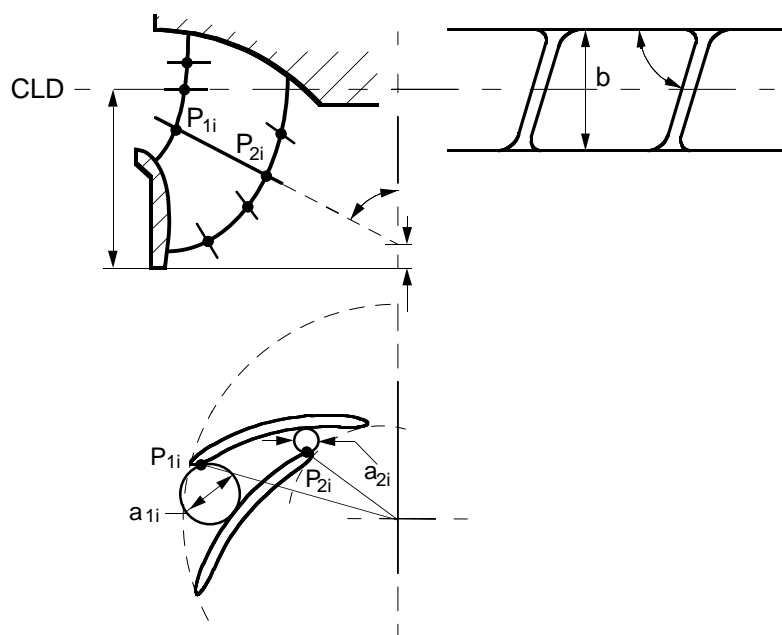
Runner/impeller of radial flow machine. Check of inlet and outlet widths between blades (example of a pump-turbine runner)
